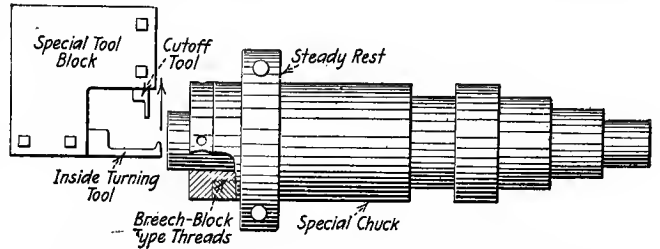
ENGINE LATHE SET-UP FOR CUT-OFF AND PARALLEL TURNING
